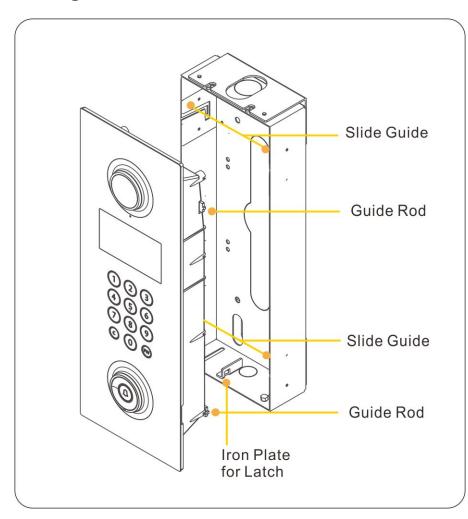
Install DP3010R Main Unit onto Wall Mounting Box
